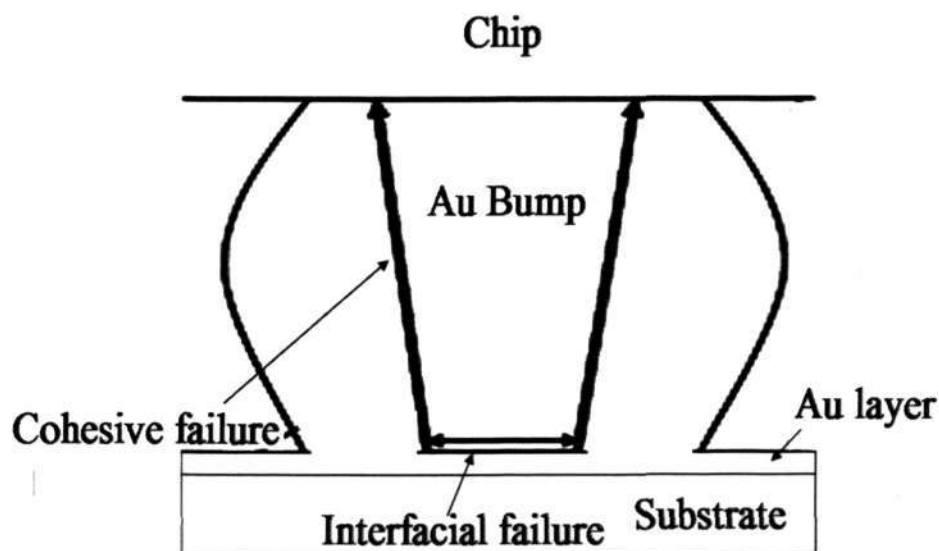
Illustration of two types of failure observed in gold joints after fracture
